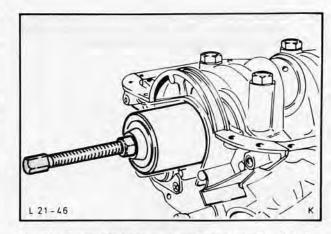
Centre timing cover, using Special Tool 21-009-A
